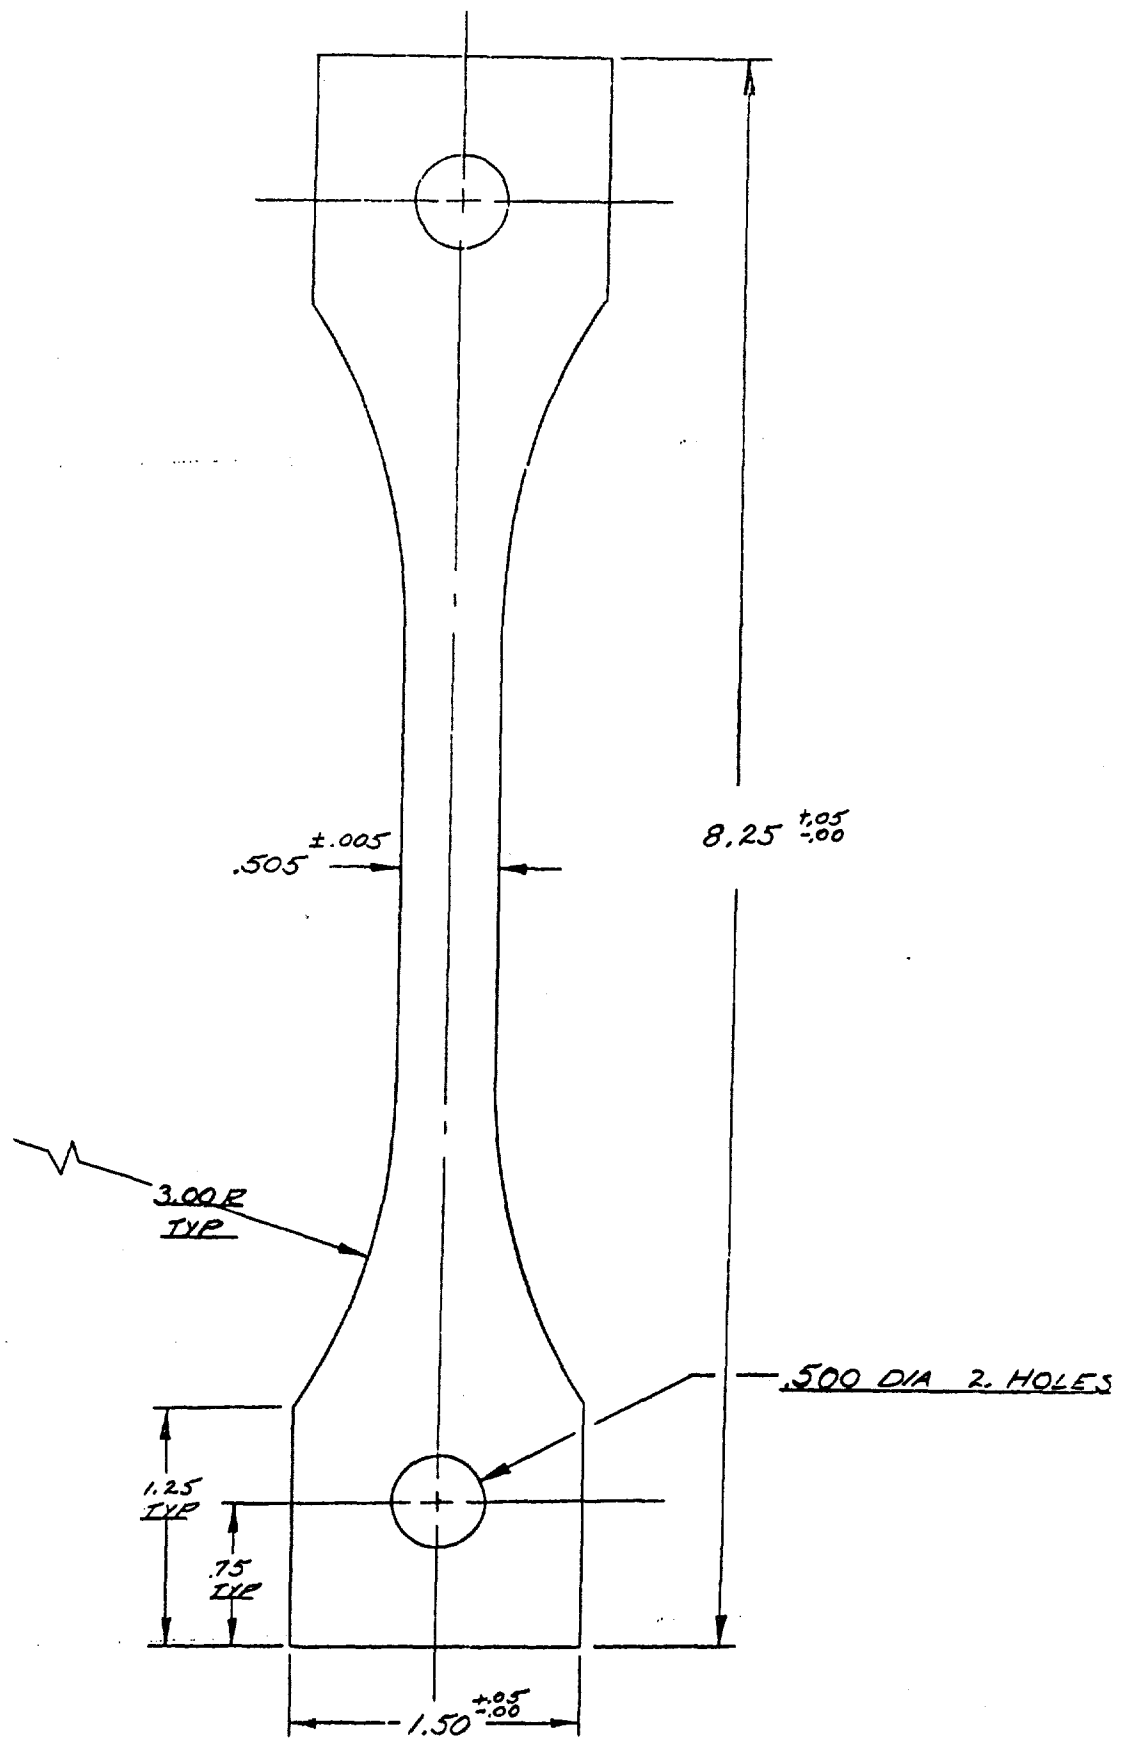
TENSILE TEST SPECIMEN (PIN JOINT TYPE).
